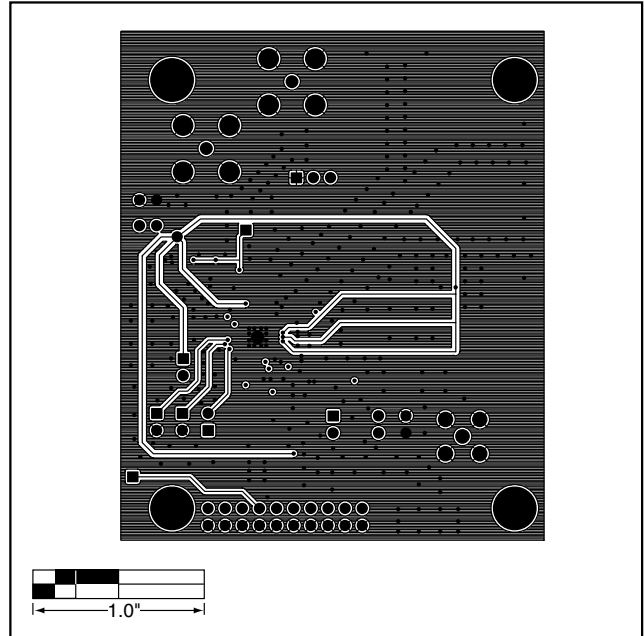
MAX2150 EV Kit PC Board Layout—Layer 3
